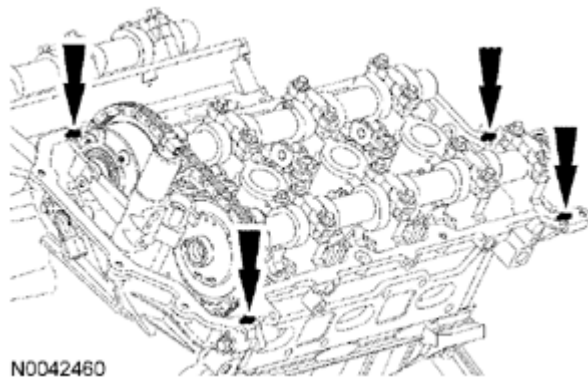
Locating Sealant At Cylinder Block To Front Cover Mating Surface And Cam Seal Retainer-To-Cylinder Head Joints
